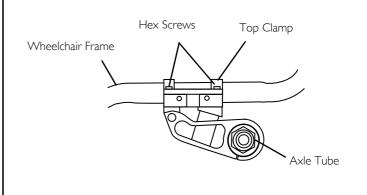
Adjusting Wheelbase Length (Adjusting Center Of Gravity).
